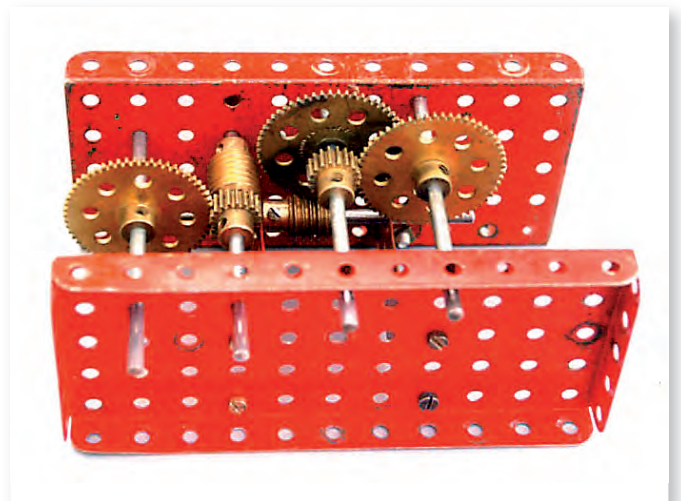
Side-on view of the gearbox, showing standard hole positioning.
